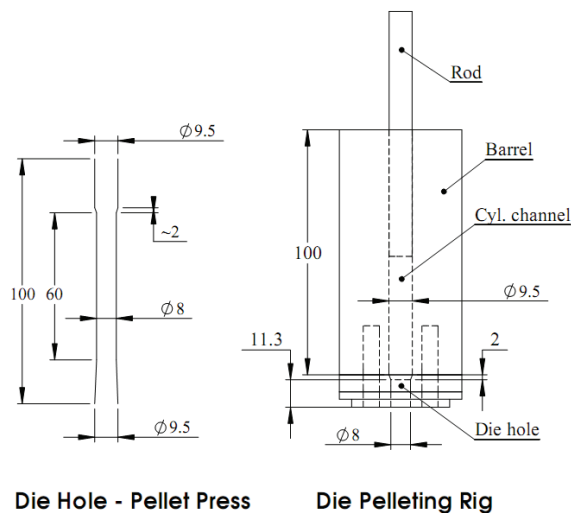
Die hole used in the Sprout matador M30 industrial pellet press (left), and laboratory die pelleting rig (right). Dimensions are in millimeters
